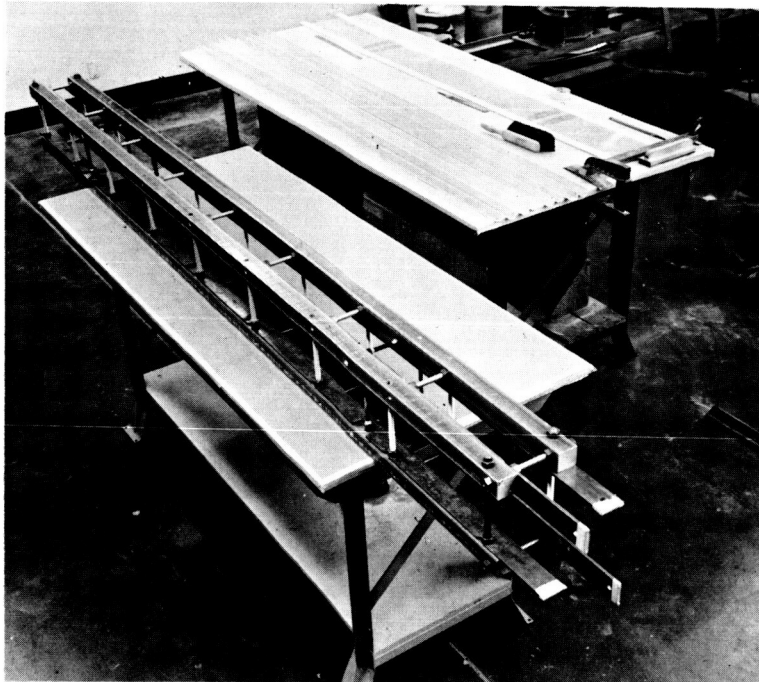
Fiberglass Reinforced Box Beam Assembly Fixture, Adjusted and Ready for Use
